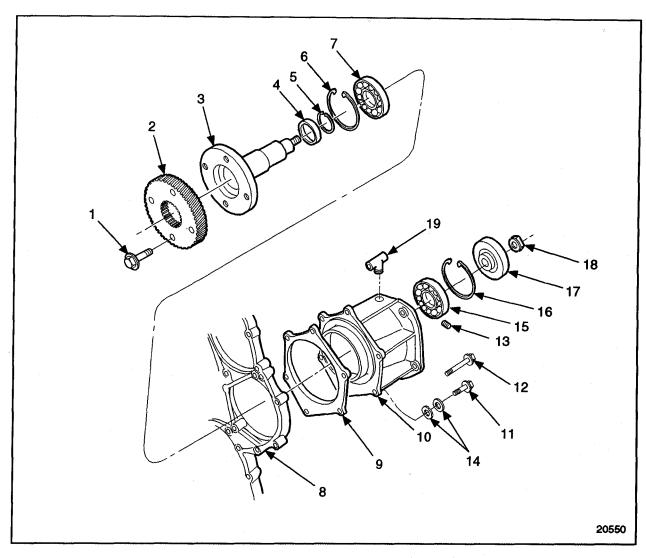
Air Compressor/Raw Water Pump Drive Detail and Location of Parts
